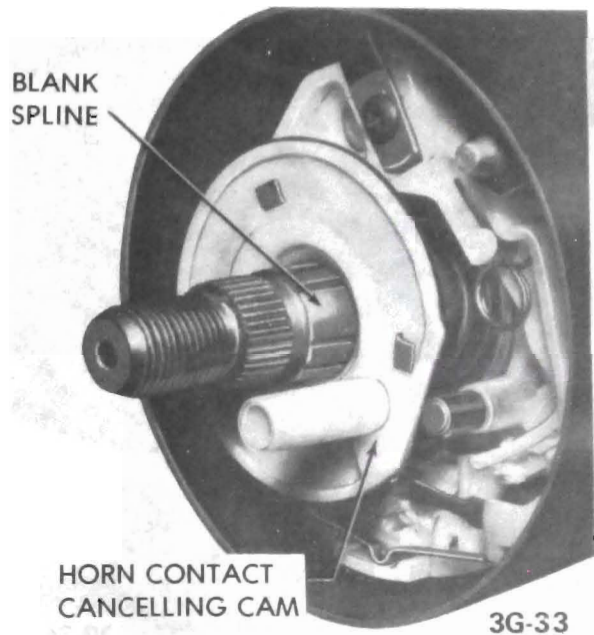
G-53 - Horn Contact - Cancelling Cam Installed
